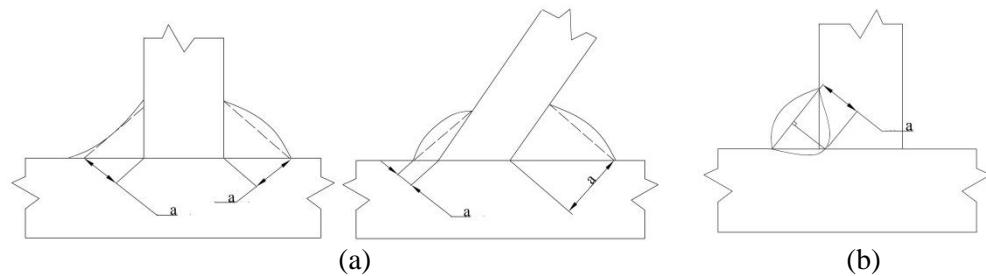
TT according to EN 1993-1-8; (a) TT of fillet weld, (b) TT of deep pen. fillet weld [7]
